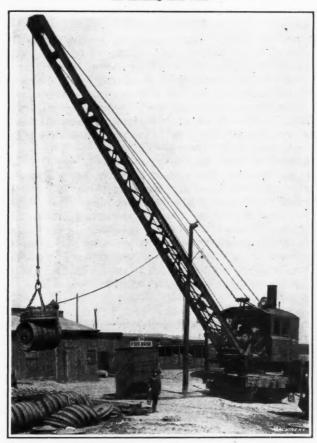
A locomotive crane is useful for handling materials in factory yards where there is a lot of space to be covered. This equipment may be employed as a switch engine when there is no lifting to be done. The illustration shows a locomotive crane and lifting magnet used by the Griffin Wheel Co., Chicago, Ill., for handling car wheels
